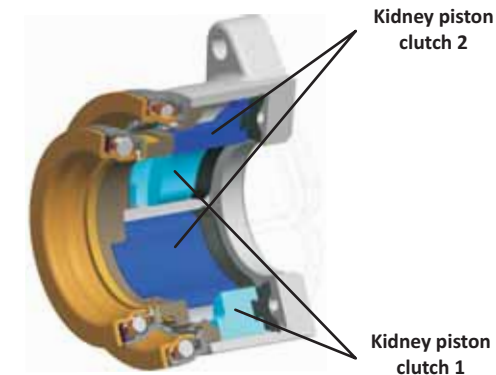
Hydraulic central engager with kidney-shaped pistons for a double clutch
